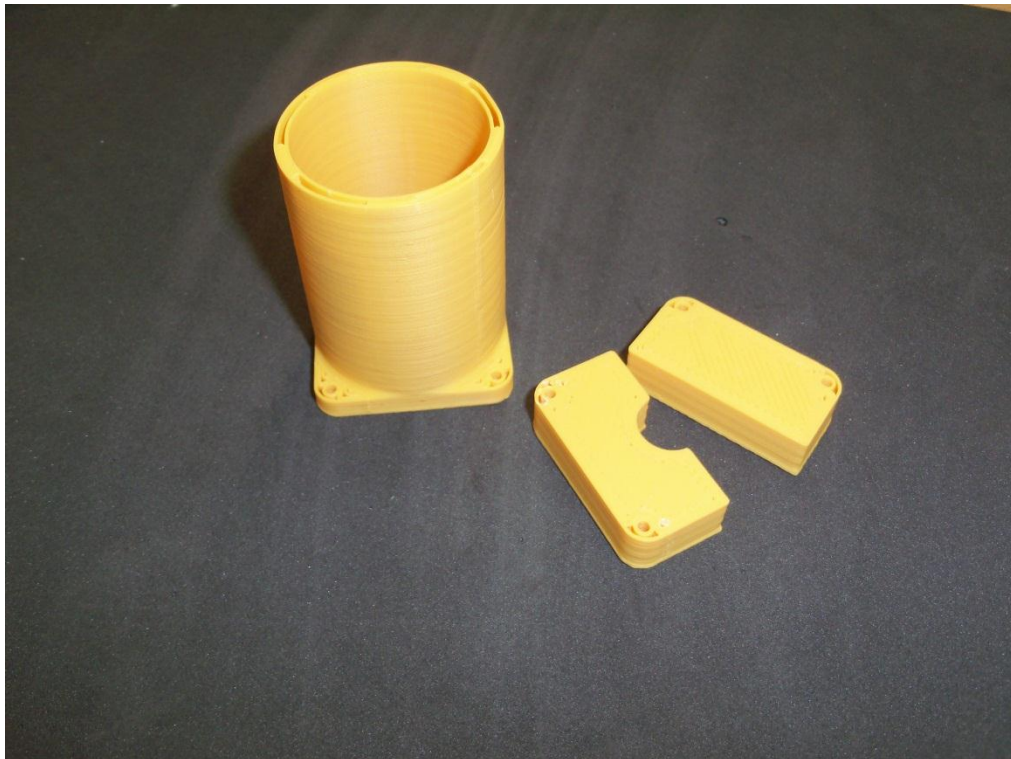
3D PRINT OF ORIGINAL FIXTURE DESIGN
